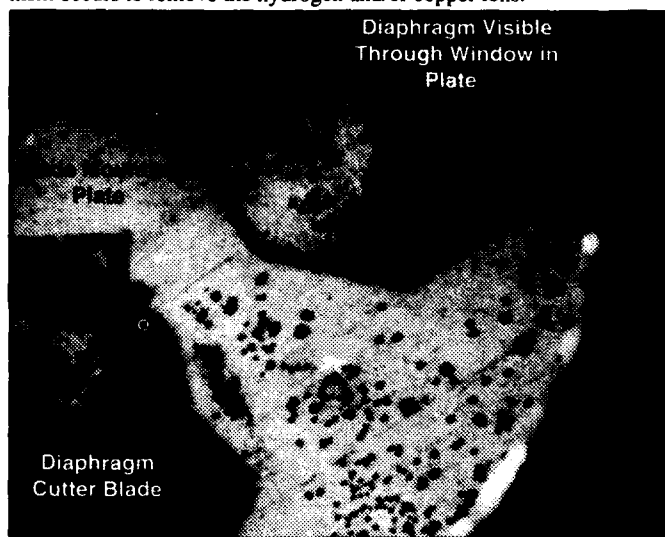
Interior view of ampule showing extensive pitting on cutter blade mounting plate and diaphragm.
